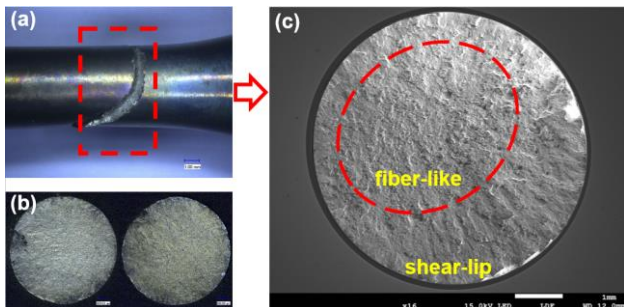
Fracture morphology of Set A: (a) general view of fracture, (b) plan view of fracture section under optical microscope, (c) plan view of fracture section under SEM.
